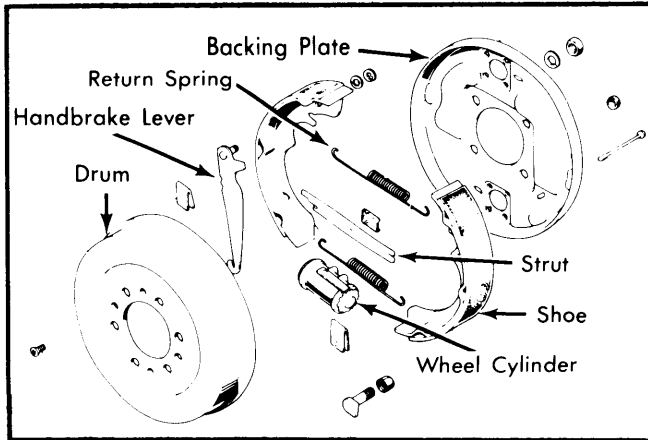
Rear Brake Assembly Showing Relationship of Internal Components
